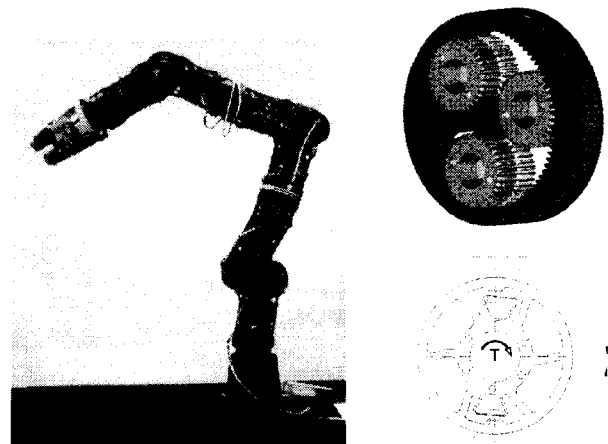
DLR's first light-weight-robot with integrated electronics (left), double planetary gearing and inductive torque sensing (right)
